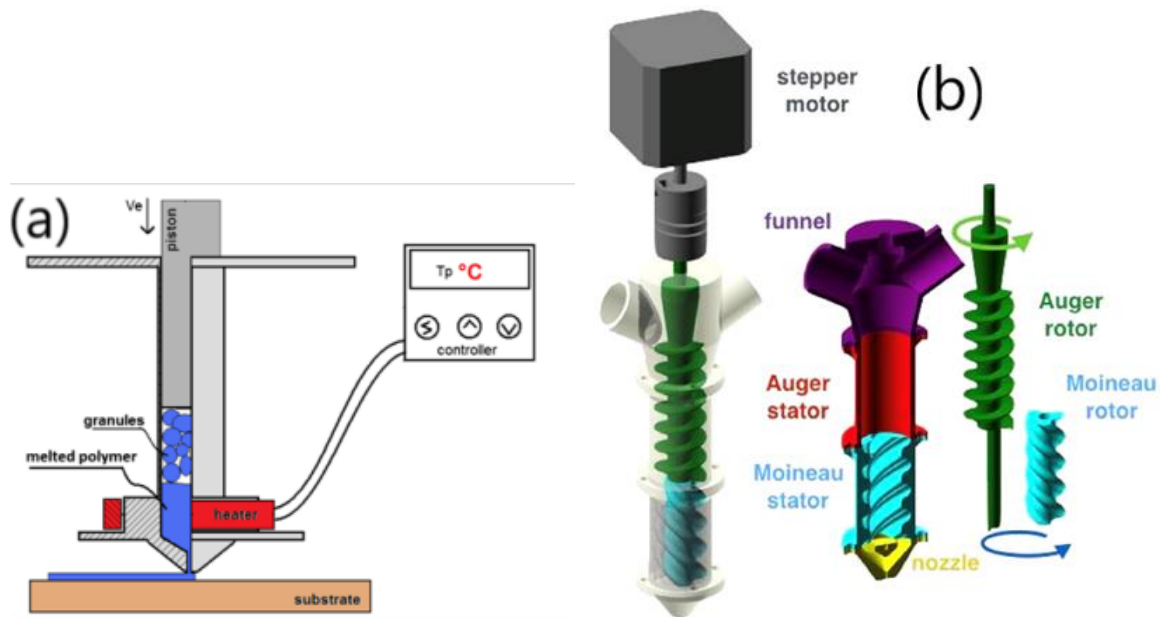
(a) Design of the extrusion piston[5]. (b). Schematics of a pellet extruder, combining together Auger and Moineau screws[24].
